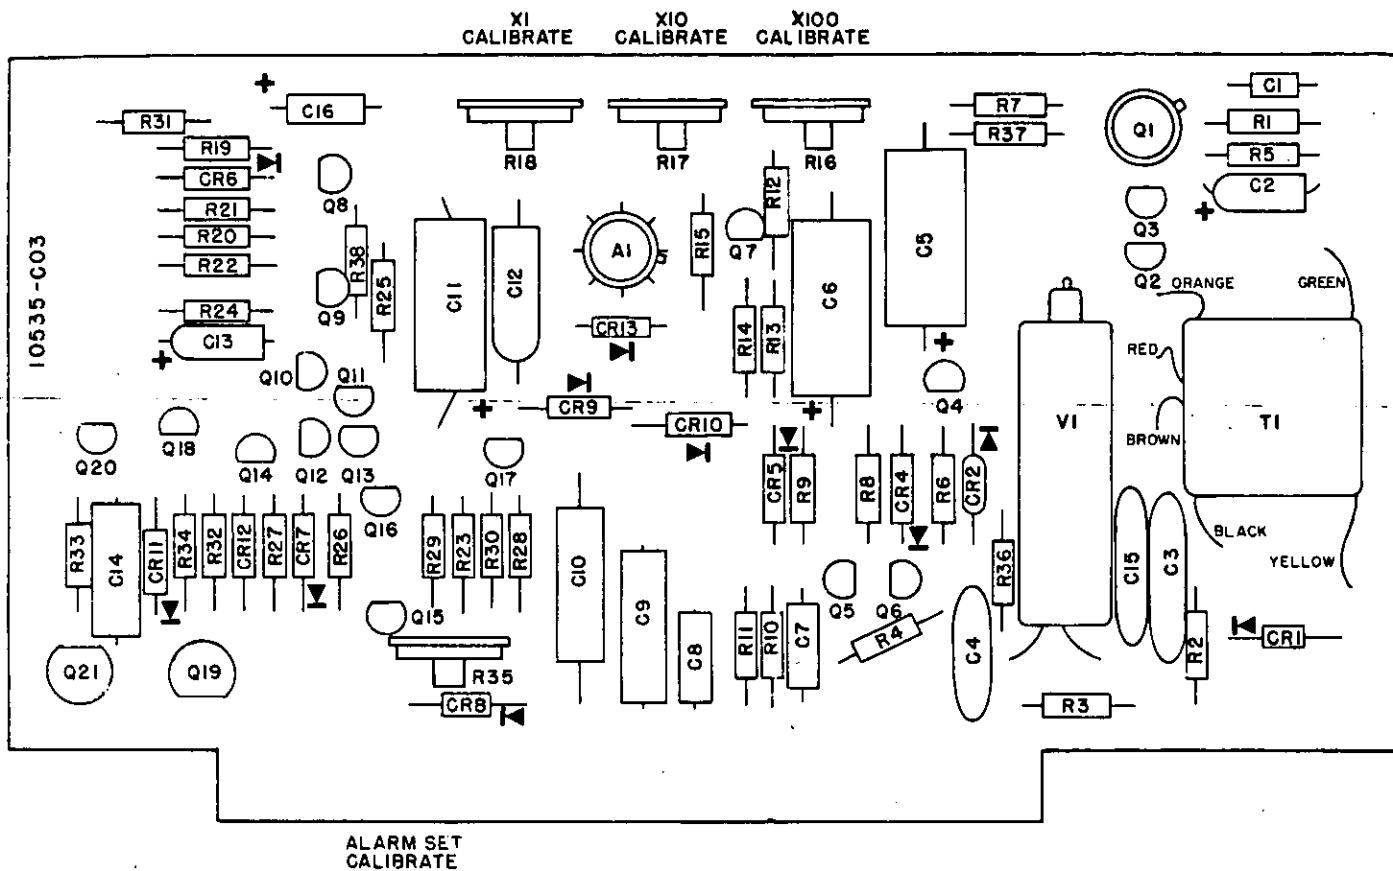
Component Layout of P-208 Circuit Board (10535-C05A-1)
